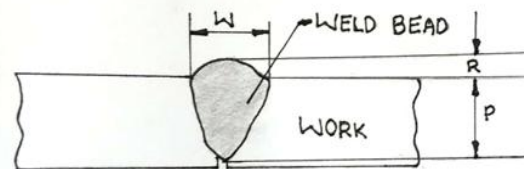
Weld bead Parameters (W – bead width; R – bead reinforcement; P – bead penetration)
